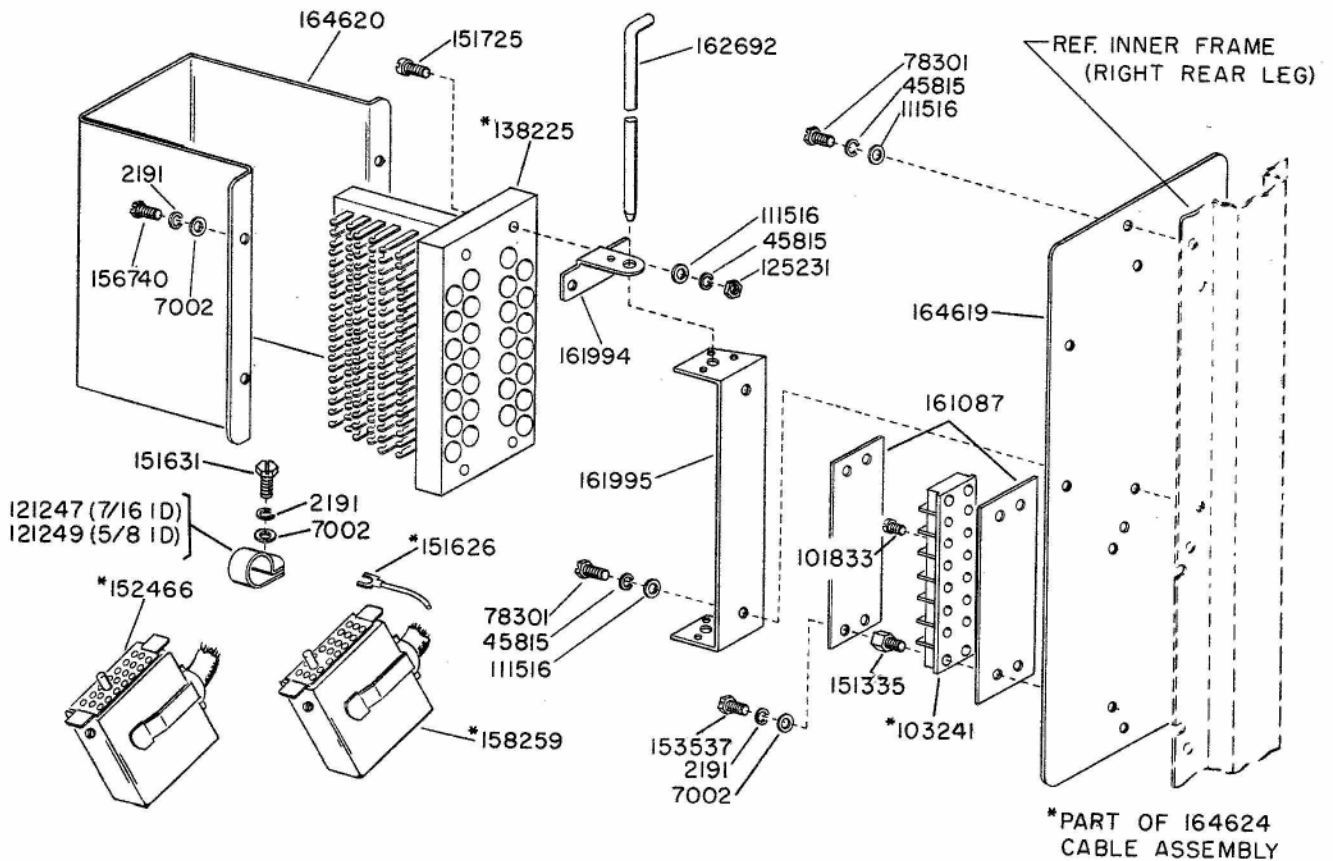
TERMINAL BLOCKS AND CABLE CONNECTORS
